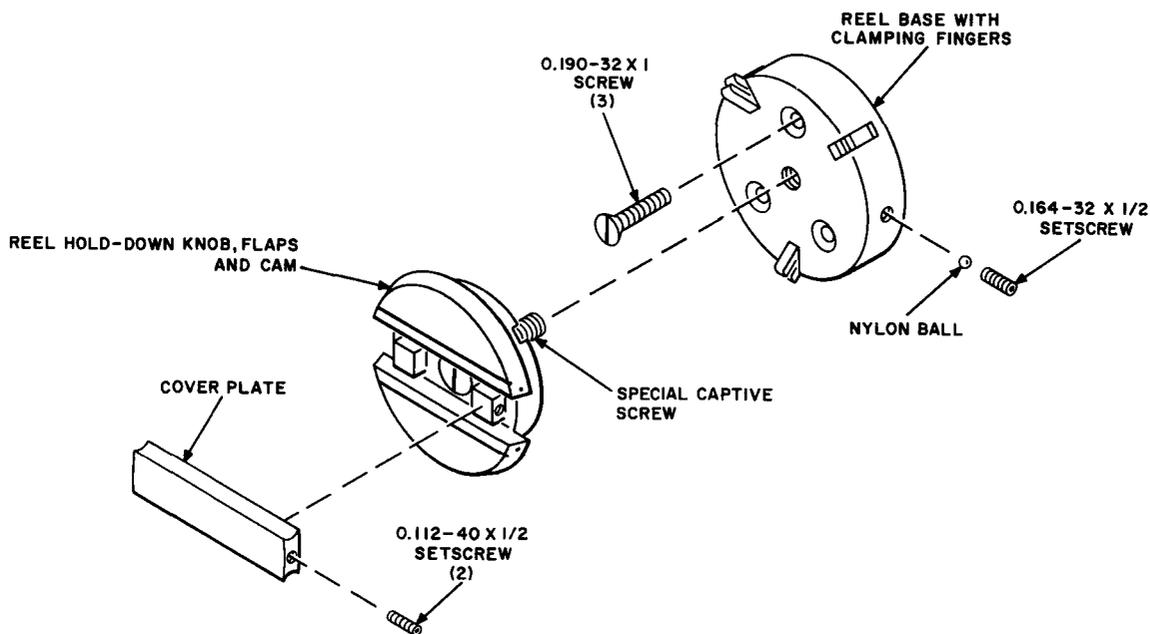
KS-19125, L 102 Reel Hold-Down Knob — Exploded View
